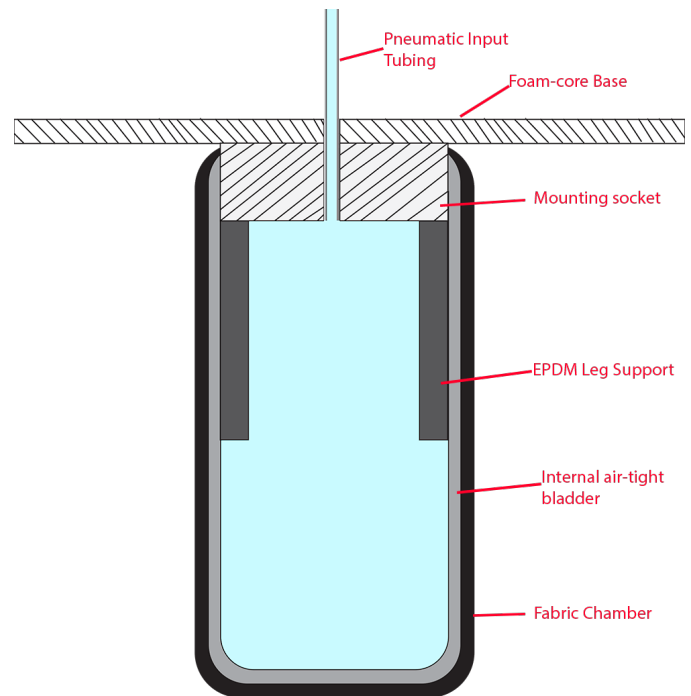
Cross sectional view of the leg chamber and how it's attached to the base through the mounting socket which is glued to the foam-core base. The supporting foam is a hollow tube made from 5mm Ethylene Polypropylene (EPDM) sheet material. This provides support for the leg by ensuring it expands in the right direction. The mounting socket is made from High Impact Polystyrene. This tube is fixed to the mounting socket through the use of a glue adhesive.
